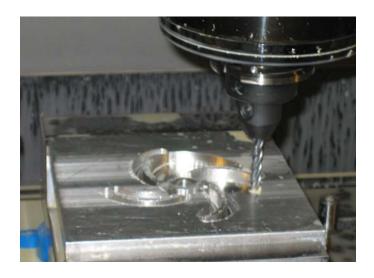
HAAS CNC Vertical Machining Center Fabricating Prototype 4 Vane Impeller
